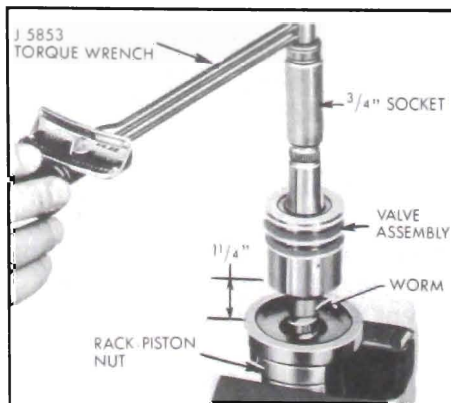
Checking Rack-Piston Nut Ball Preload
